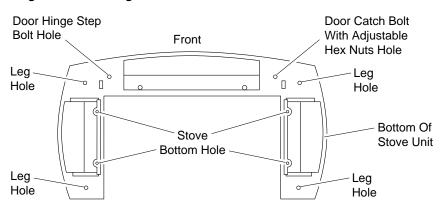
Locating of Threaded Holes for Stove Bottom, Legs, and Door Attachment
